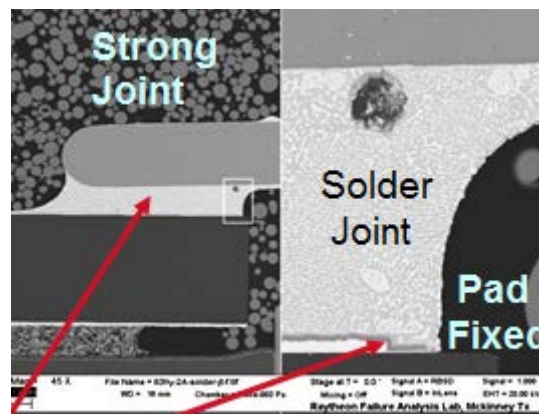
Cross-Section of Improved Pad Plating Design (45X), with Close Up View on the Right (600X).
